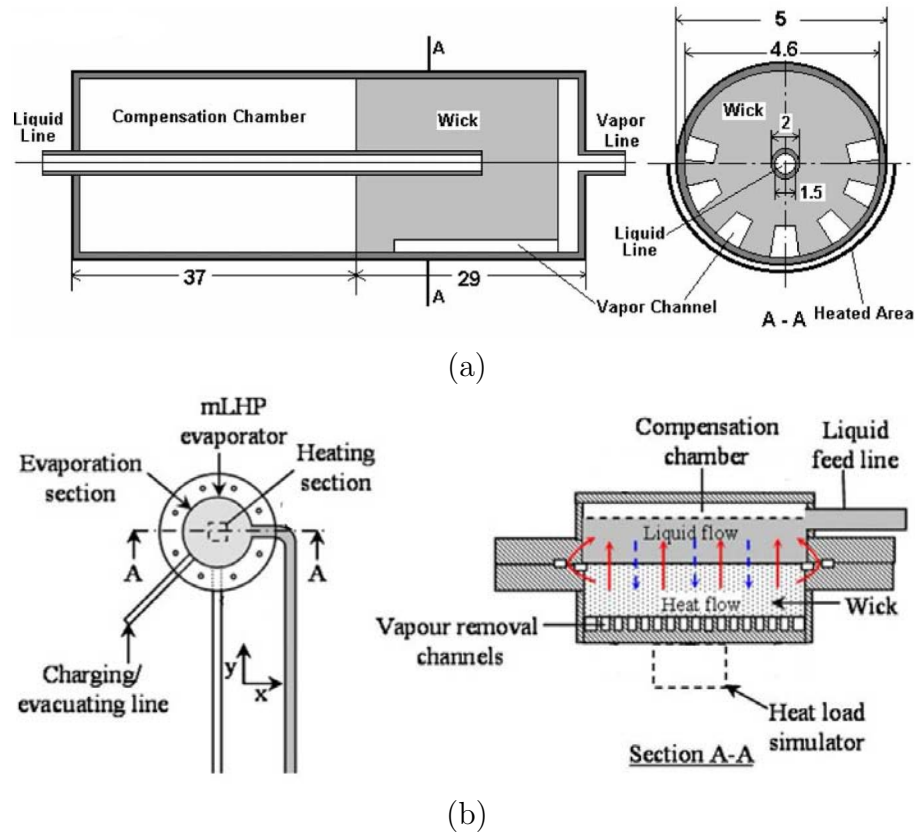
Topologies of the evaporator section, compensation chamber, and wicking structure in loop heat pipes: (a) A cylindrical evaporator (dimension in mm) [16]; (b) A flat evaporator [2].
